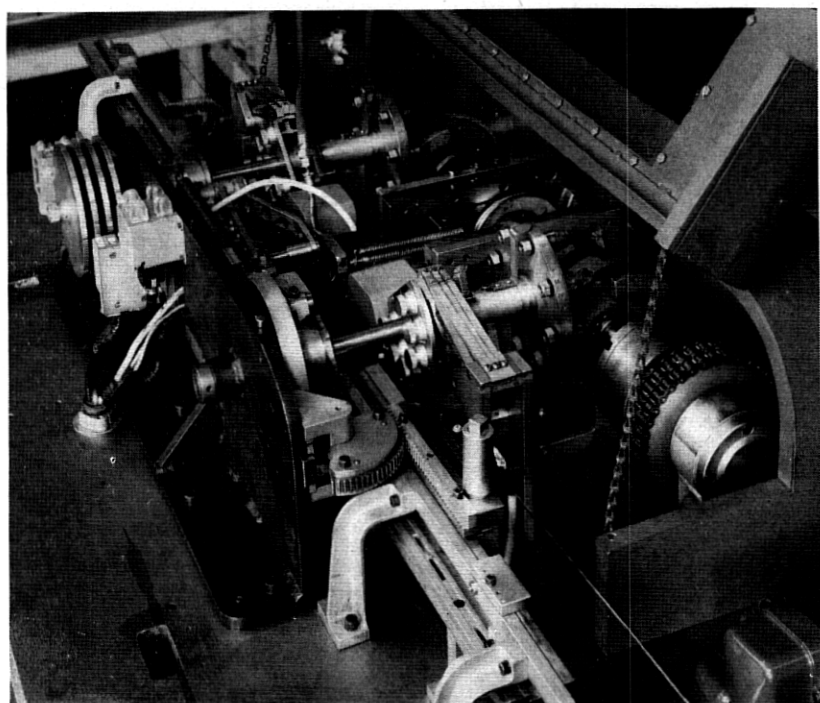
Percussion welder for contacts on single-wire combs.
